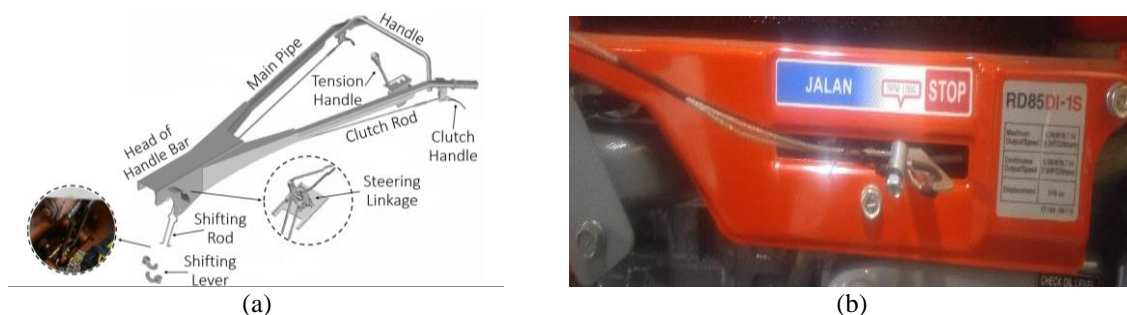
Position of (a) parts of handle bar and (b) throttle lever of the Quick G3000 tractor
